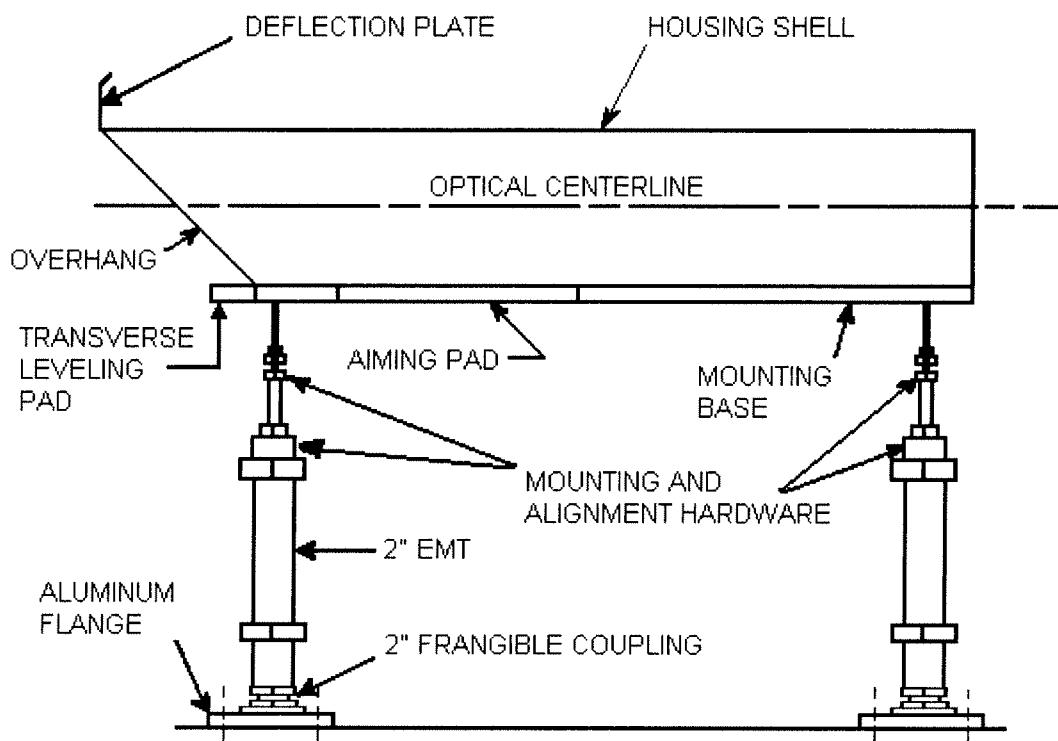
Lamp Housing Assembly Side View (Typical – For illustration only)
